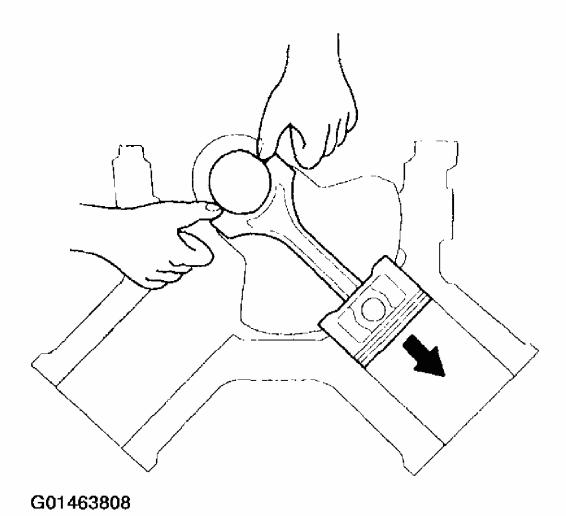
Correctly Removing The Piston Assembly Courtesy of AMERICAN HONDA MOTOR CO., INC.
